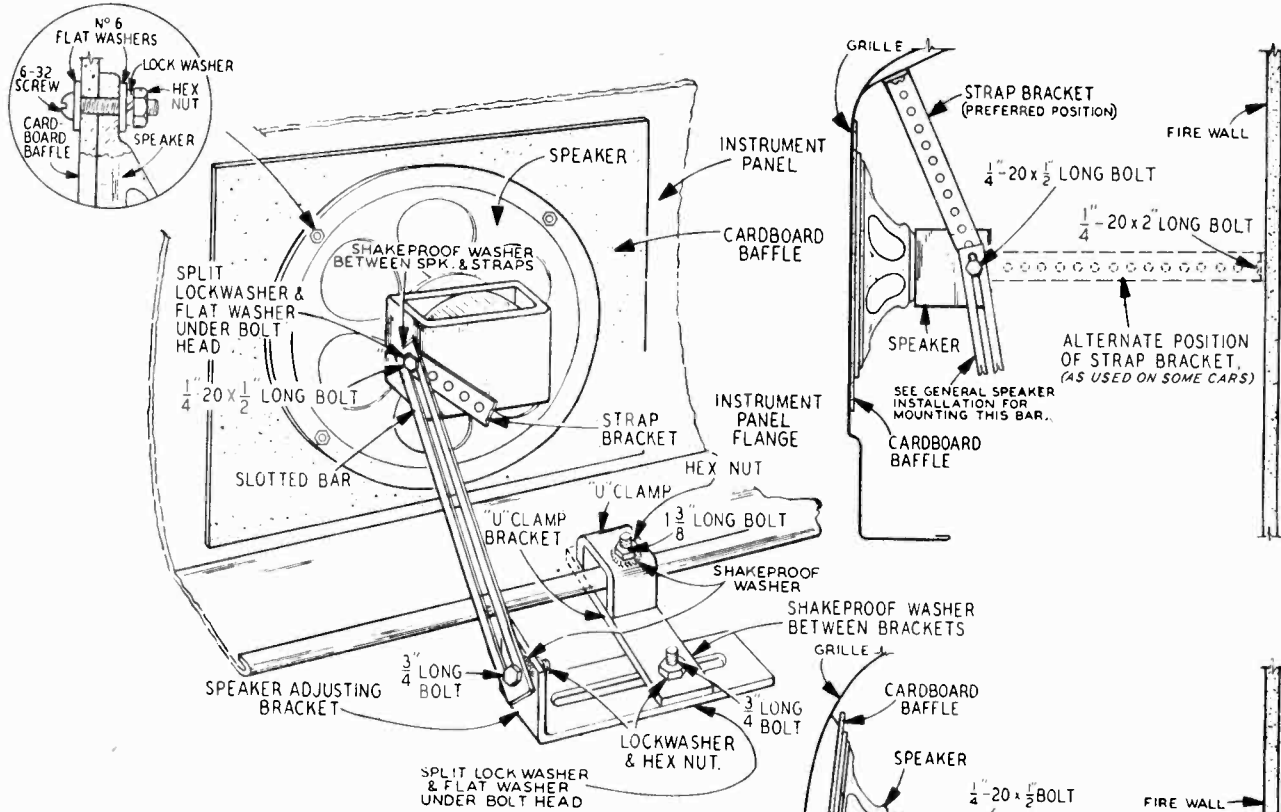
Typical Methods of Mounting Speaker Behind Instrument Panel Grille
